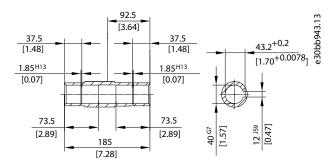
Steel/Stainless Steel 40 mm Shaft
